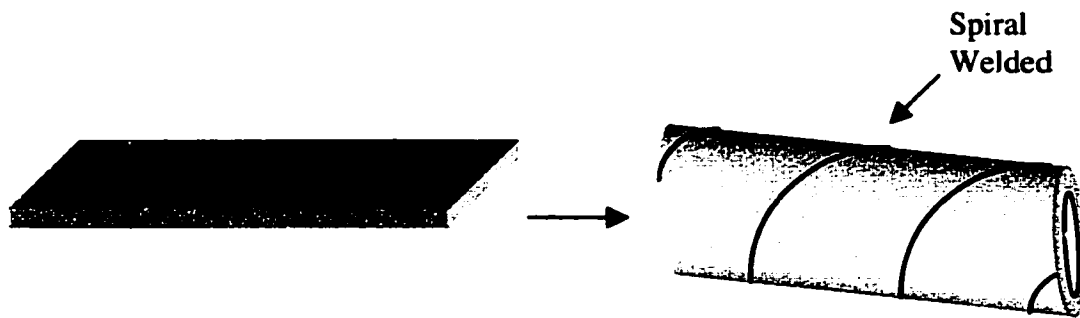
Spiral submerged metal arc welding (SMAW) pipemaking.
